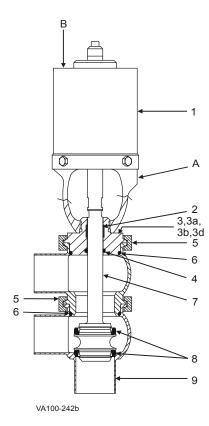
W62/W82 Divert Valve (Air-to-Raise Shown)
